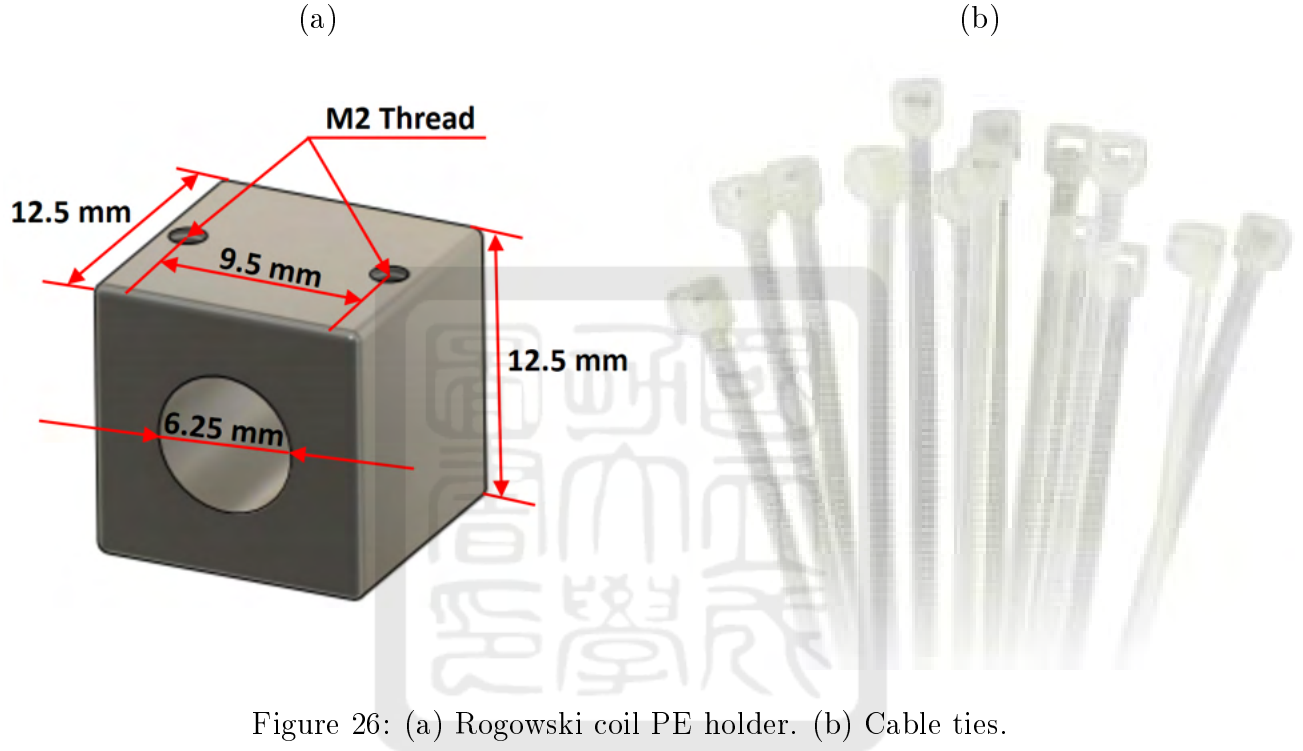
(a) Rogowski coil PE holder. (b) Cable ties.
